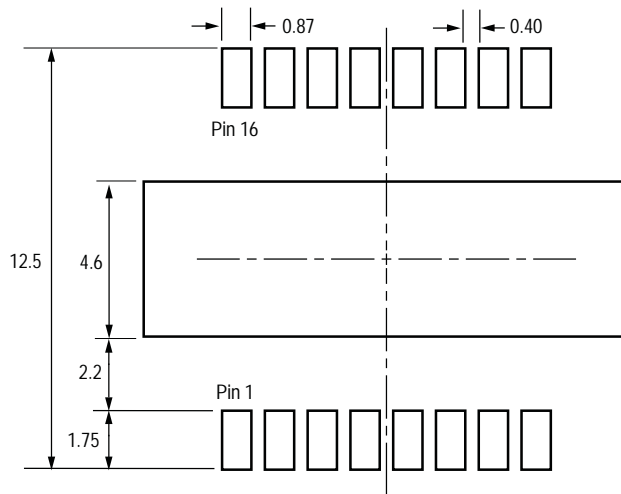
Recommended Solder Pad Layout, dimensions in mm
